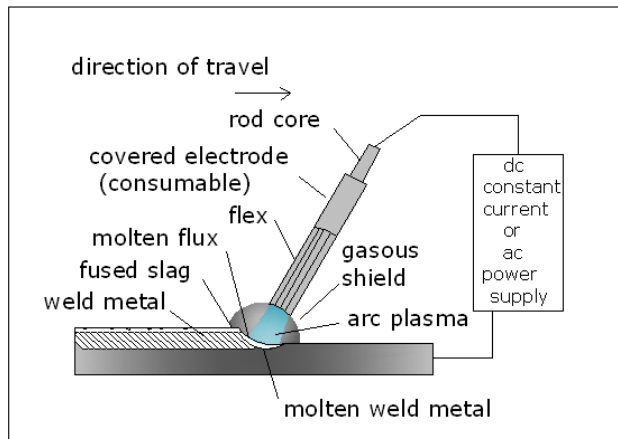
Schematic drawing of Shielded Metal Arc Welding Unit
